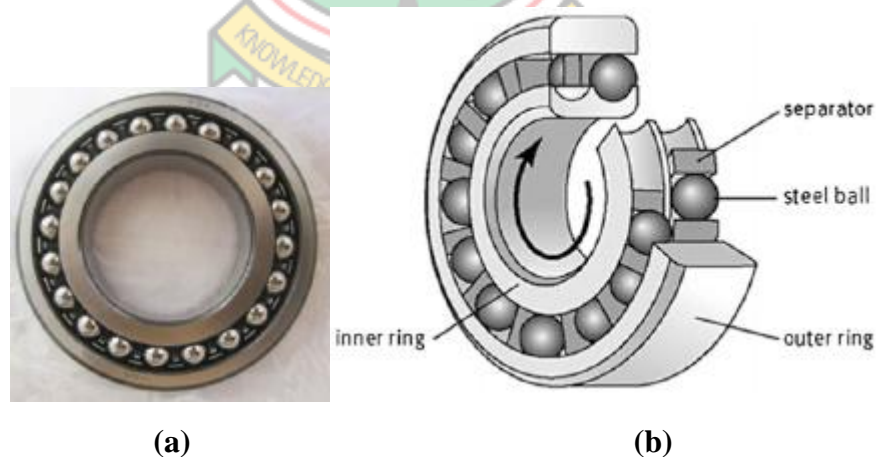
Ball Bearing: (a) Typical and (b) Dissected
